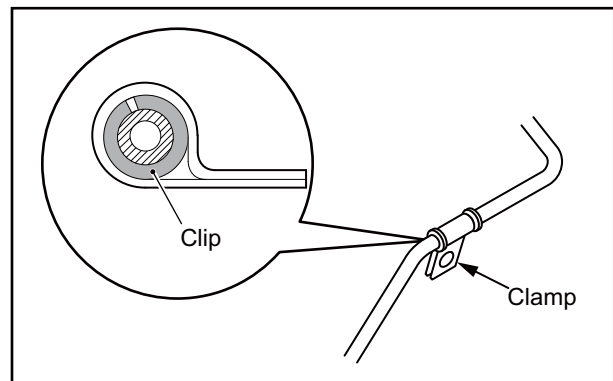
Low Pressure Fuel Pipe, Oil Pipe and Clip - Inspect and Replace
